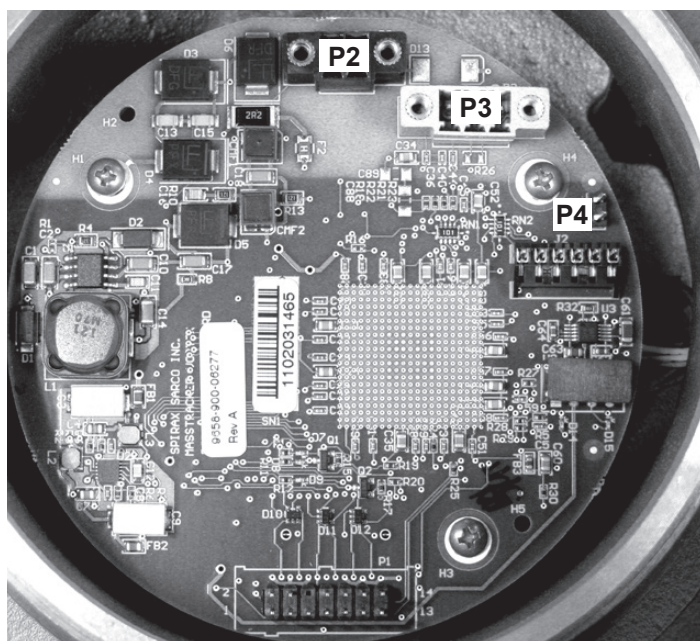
VLM10 and RIM10 remote slave, pipe-mount terminal board diagram
